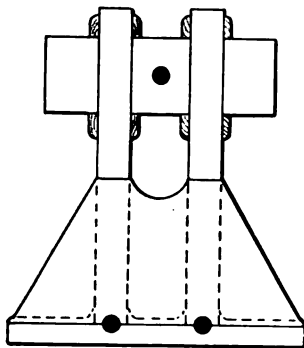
View of One-half of Pattern for Equalizer bearing, Facing the Parting.
